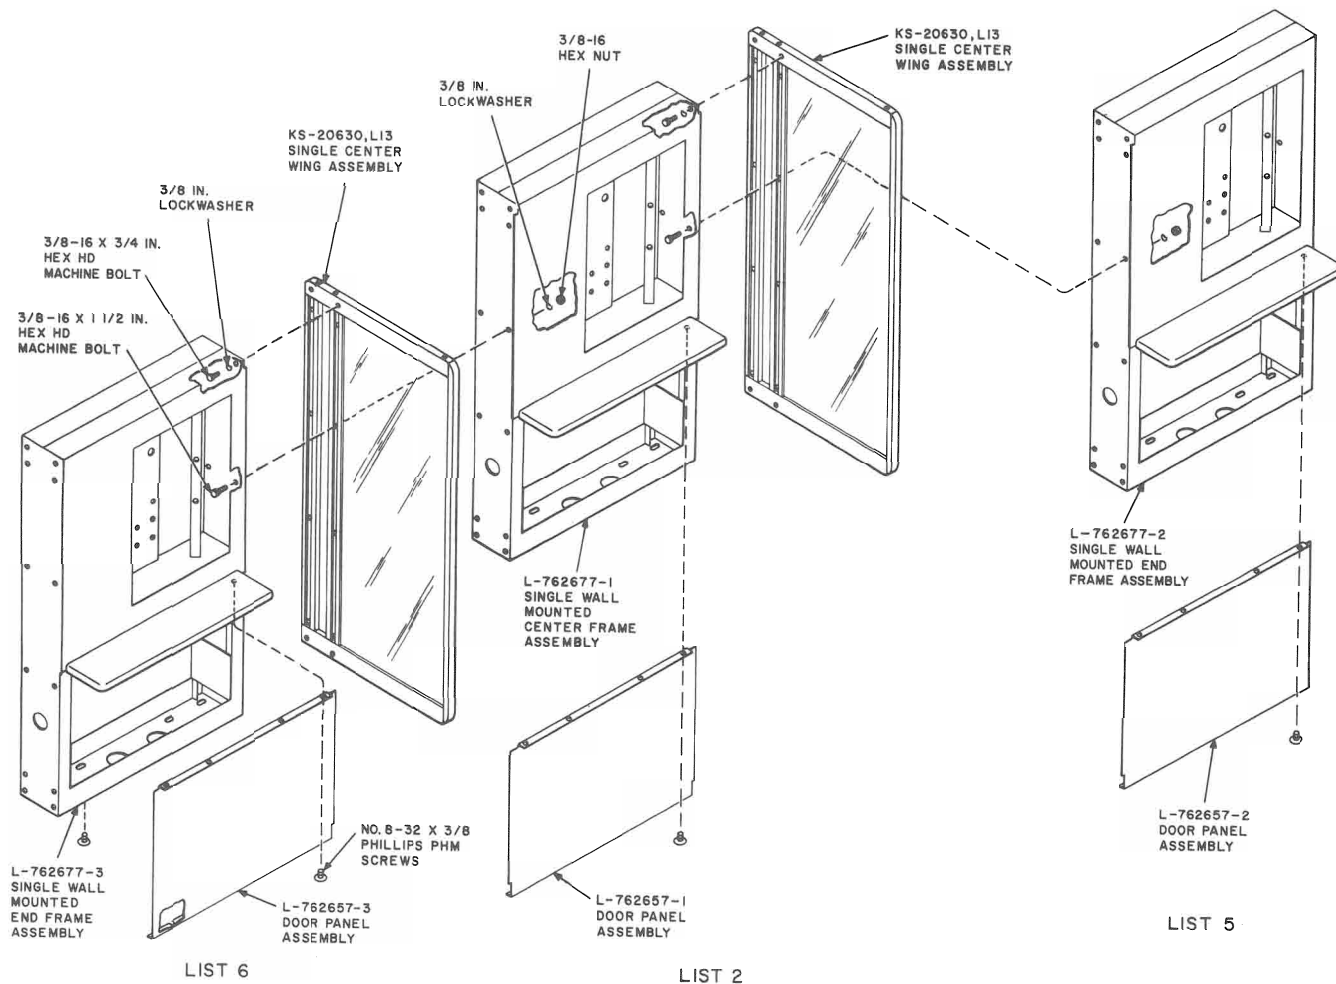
Multiple Wall Mount Without End Wing Assemblies
